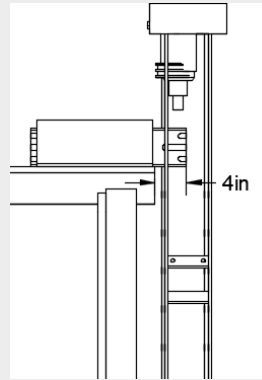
Longitudinal View IS20 Part, anchor and force block
